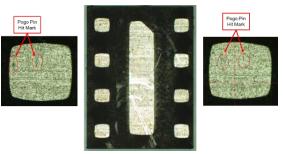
This is a sample unit of device contact pad that resulted to Kelvin Check Fail during Electrical Test using Pogo Pin (force and sense) Test Socket.
